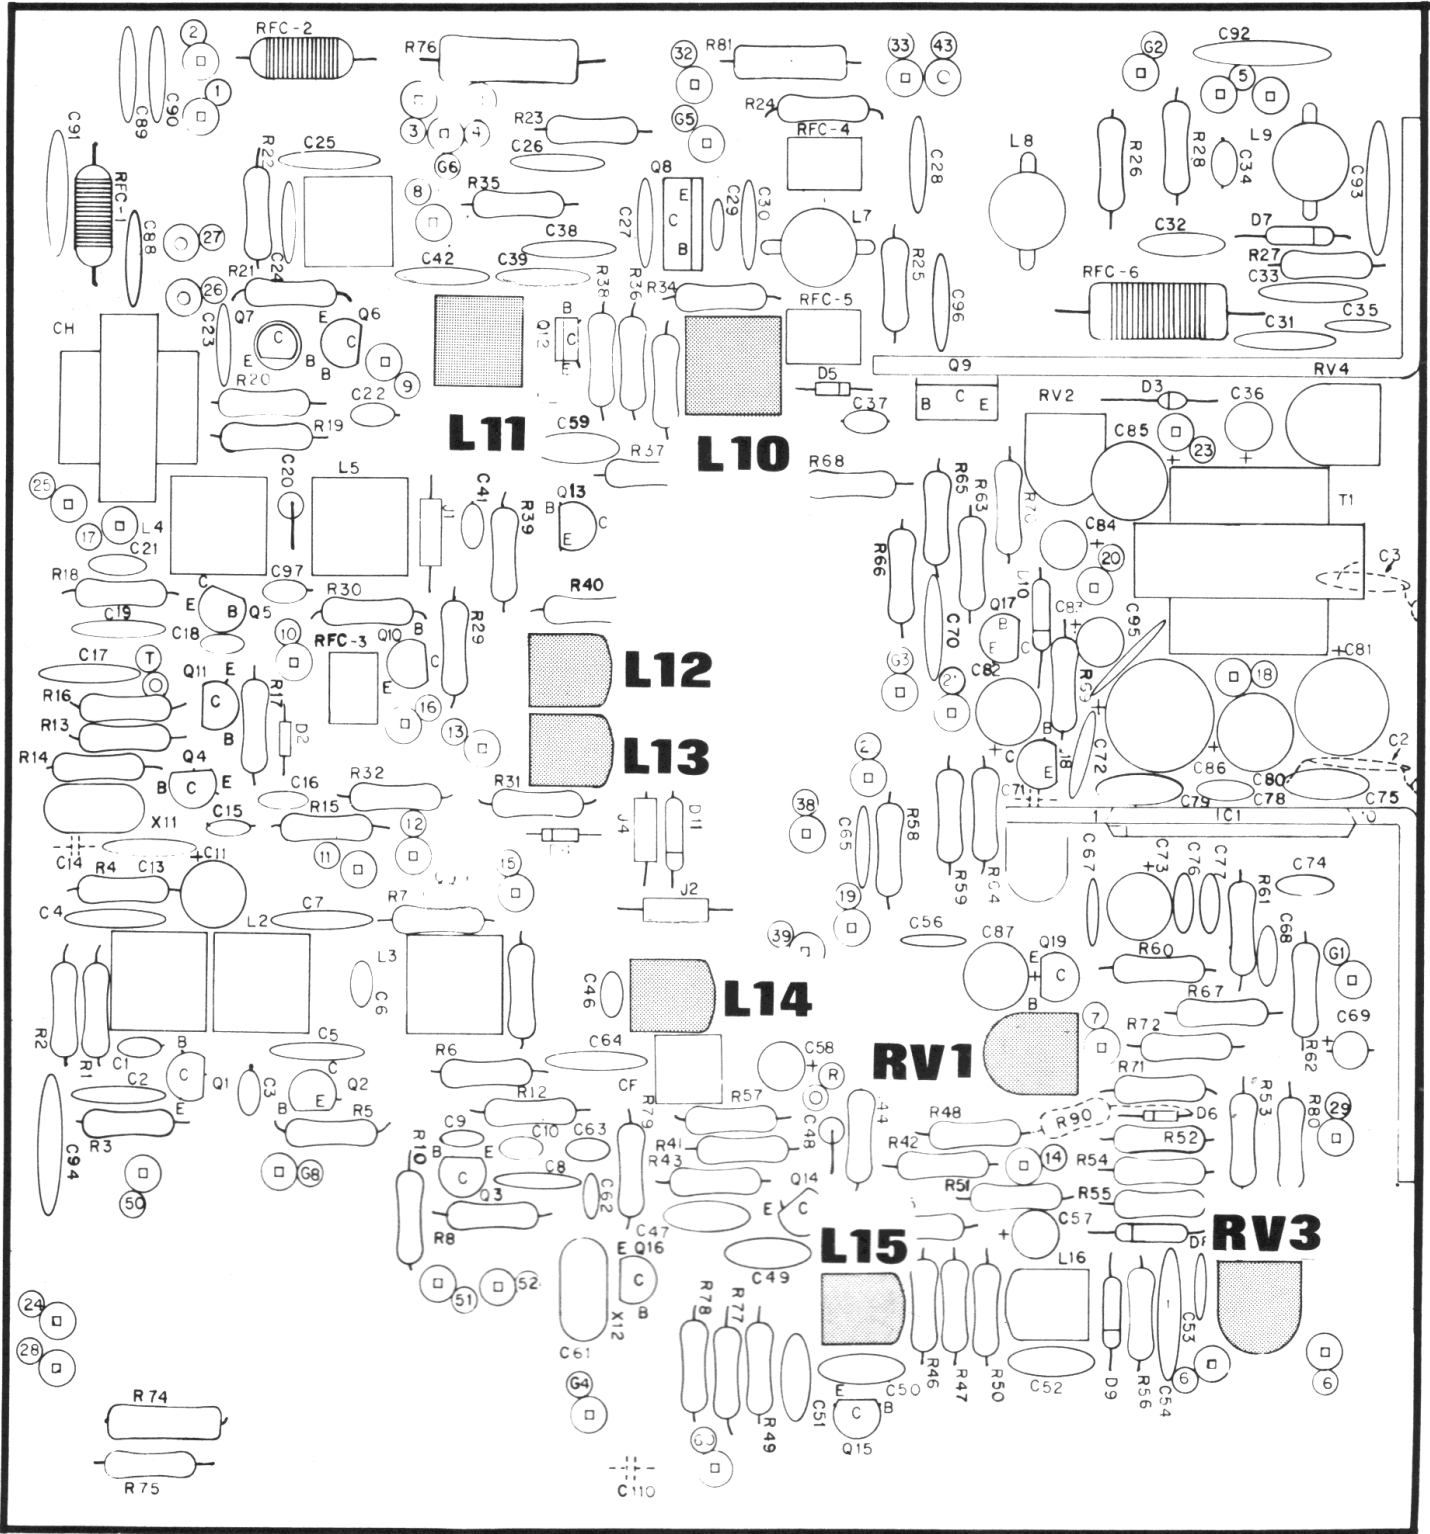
Components to be Adjusted for Complete Receiver Alignment
